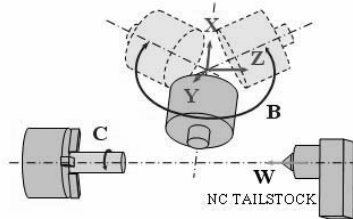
The Multi-Profession Tool in the Mazak Ingerex 100-IV Machine and Kinematic Figure of the Machine
